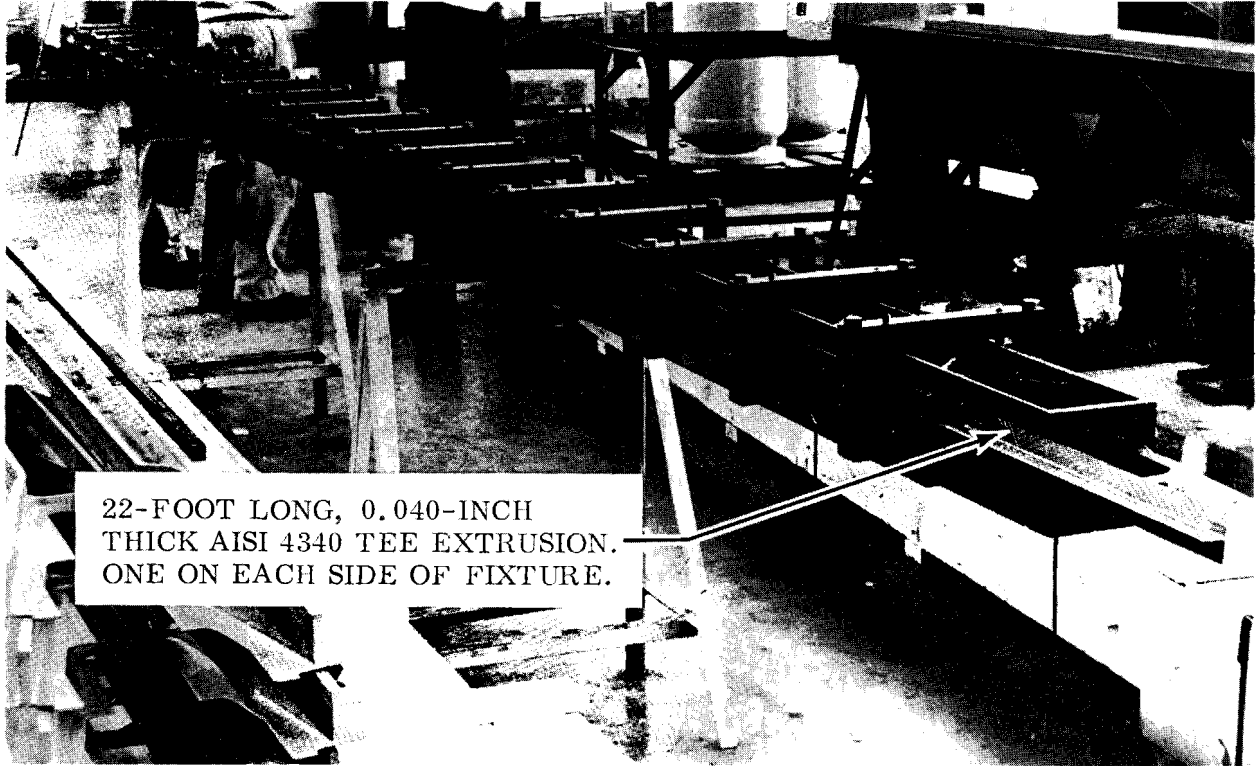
PHOTOGRAPH OF TEE EXTRUSIONS IN TEMPERING FIXTURE
